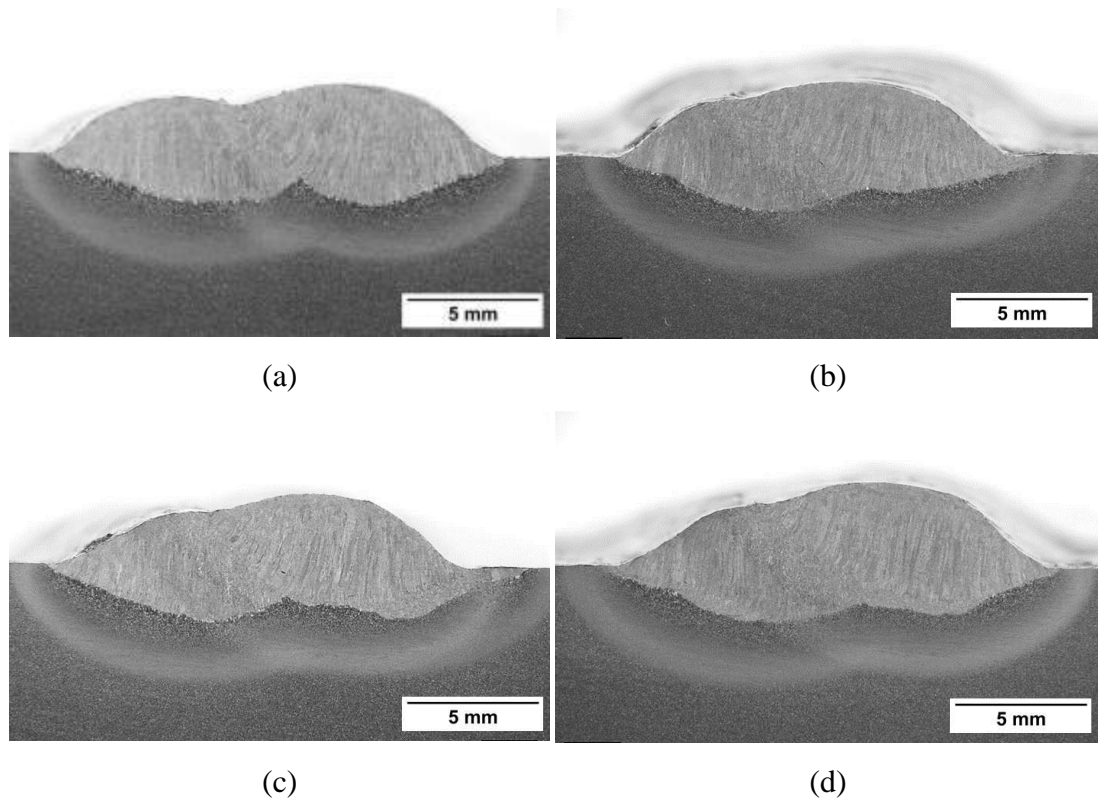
Macrographs of BoP repair welds. Macrographs (a), (b), (c) and (d) are BoP1, BoP2, BoP3 and BoP4, respectively. BoP 1 is first weld and BoP 4 is forth weld (third repair weld). The first-pass of the weld is on the left side and the second-pass was on right side.
